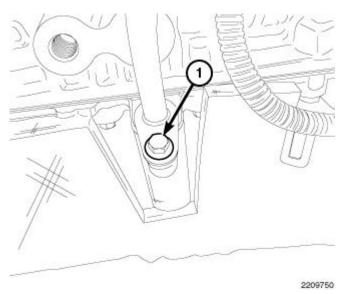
Oil Indicator Lower Bolt Courtesy of CHRYSLER LLC
